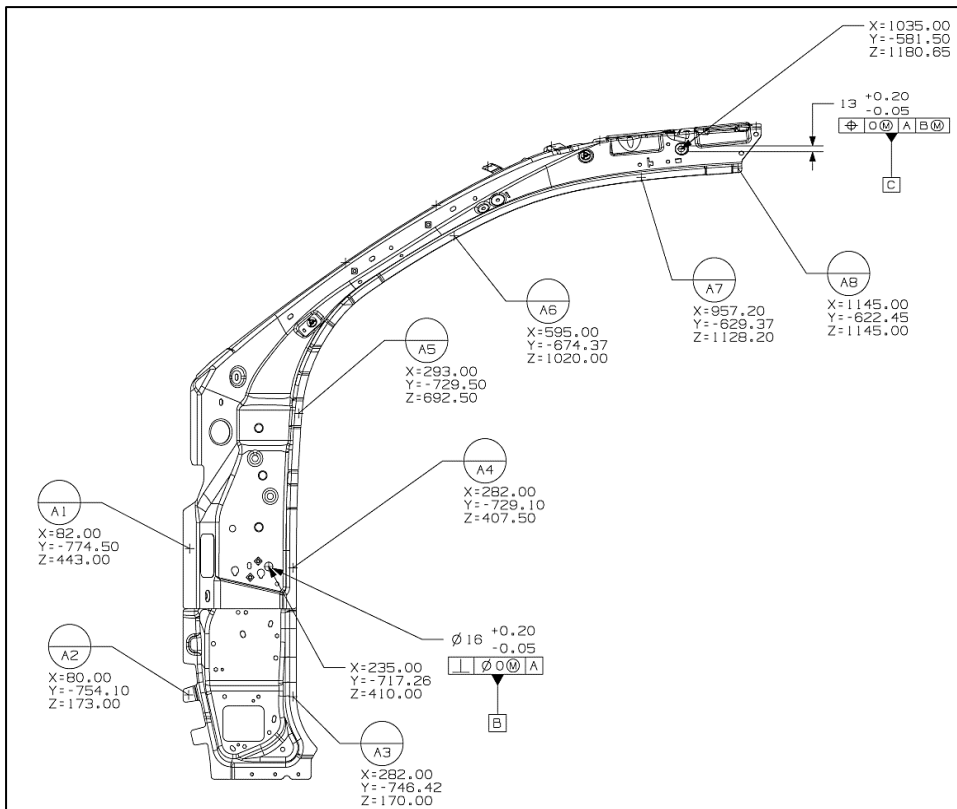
GD&T of A-Pillar parts original version.
